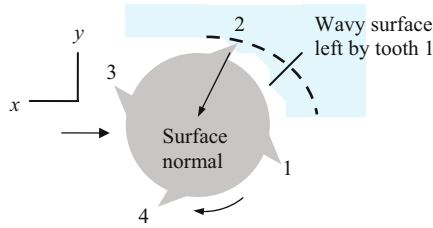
Regeneration in milling. Cutter deflections during the passage of tooth 1 are copied onto the workpiece surface and are encountered by tooth 2. This varies the chip thickness and cutting force which, in turn, affects the resulting tool deflections
